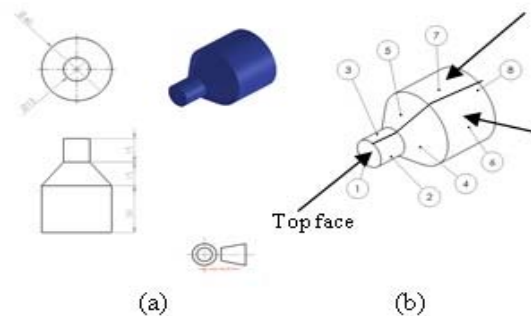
(a) The detailed drawing of example 3D CAD model, (b) The top, bottom and contour faces definition and its 8 faces.
